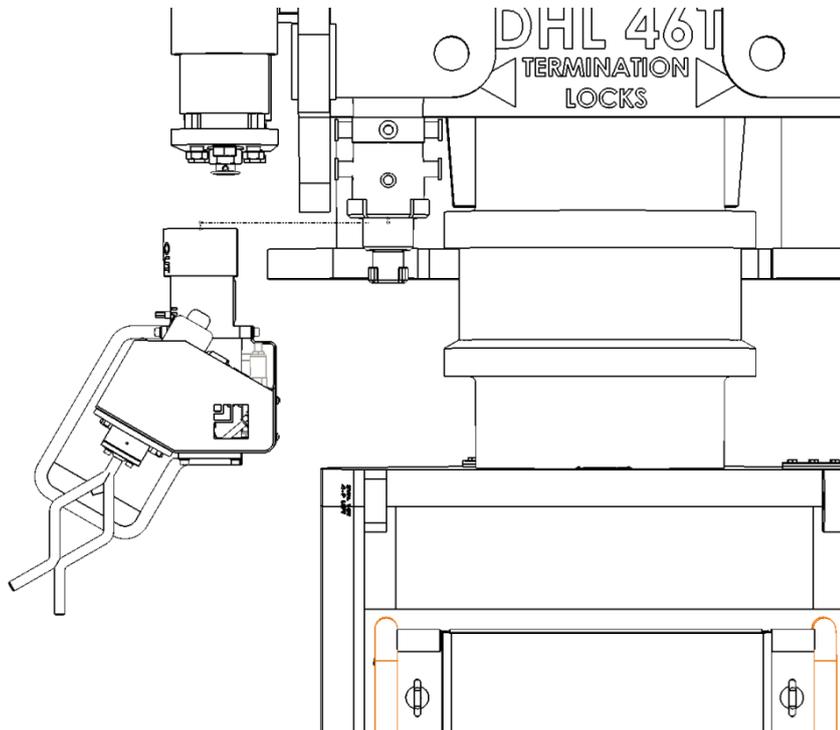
Position before connection to Installation Tool, typical (view above)
